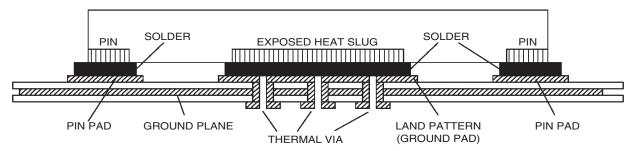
P.C. Assembly for Exposed Pad Thermal Release Path – Side View (Drawing not to Scale)
